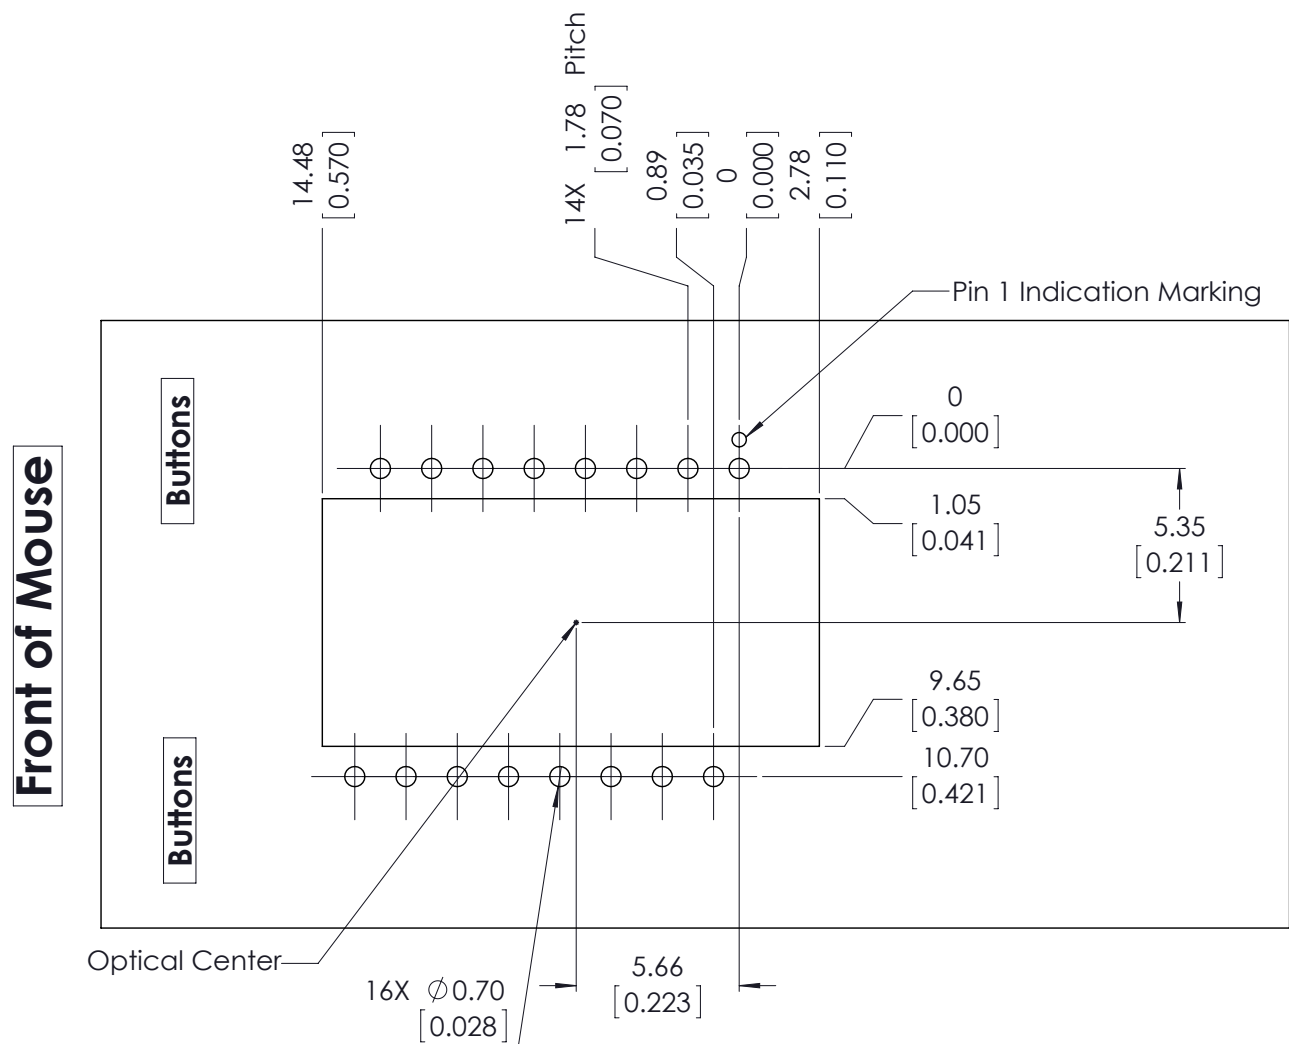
Recommended chip orientation, mechanical cutouts and spacing (Top View)
